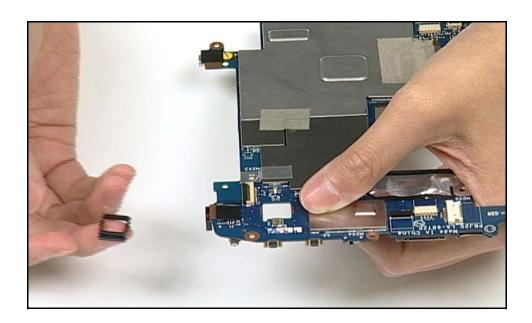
Removing Rear CCD Holder (3 of 3)
